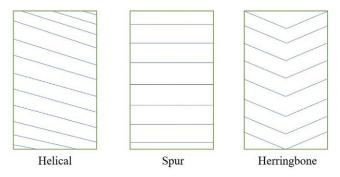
Schematic representation of helical, spur, and herringbone gears.
